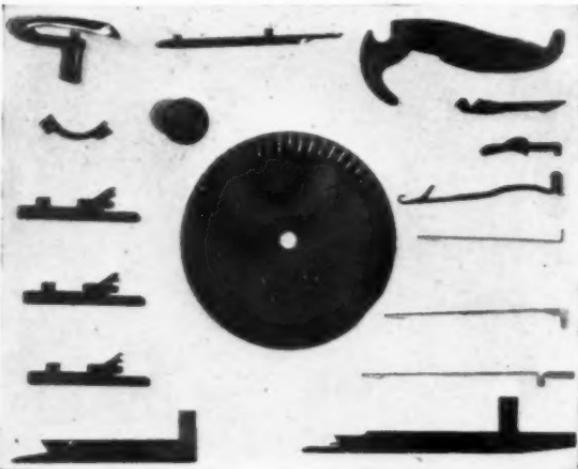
A group of knitting needles, jacks, sinkers and other parts used on textile machines. Projection is employed for inspecting all of these parts.
